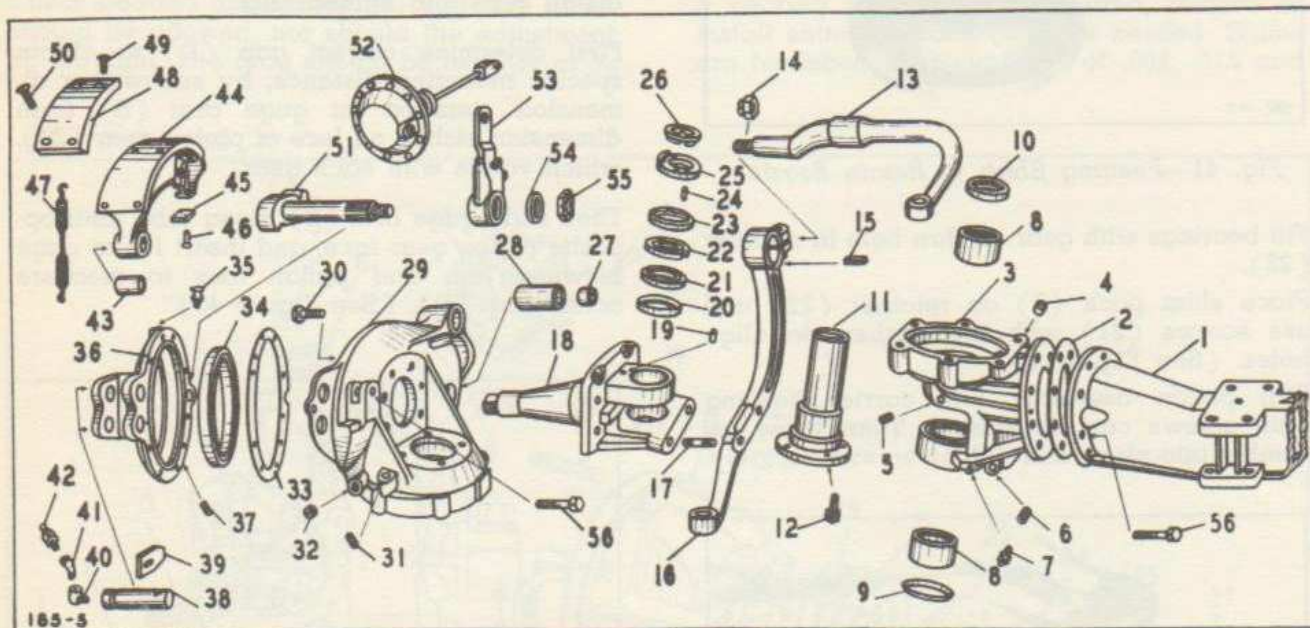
Exploded View of Housings, Steering Knuckles and Brakes
